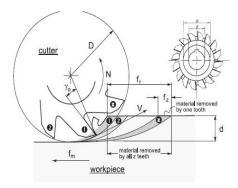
26-teeth Plain Milling Cutter Used for Peripheral or Slab Milling
